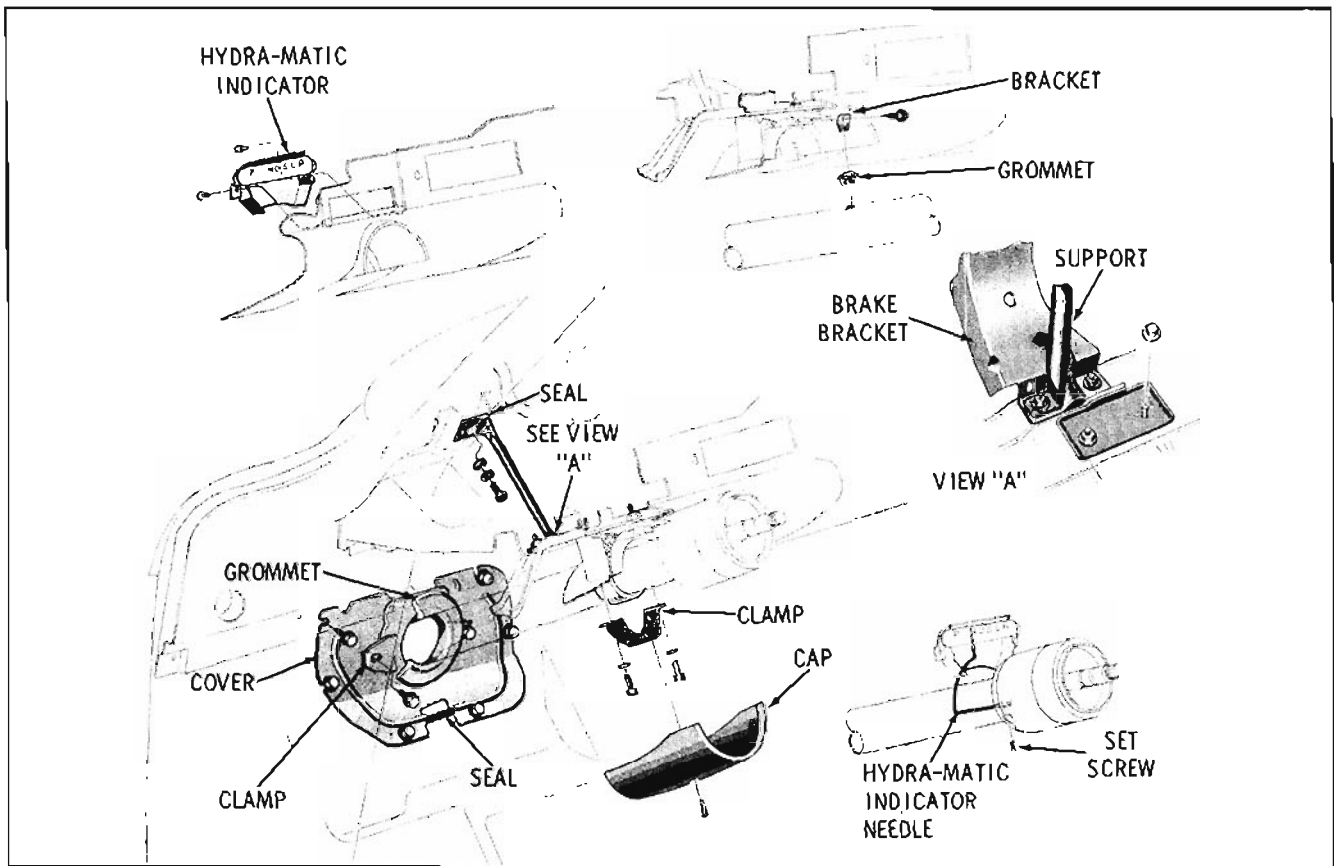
Steering Column Installation (33 - 34 - 35 - 36 - 38 & 39 Series)
